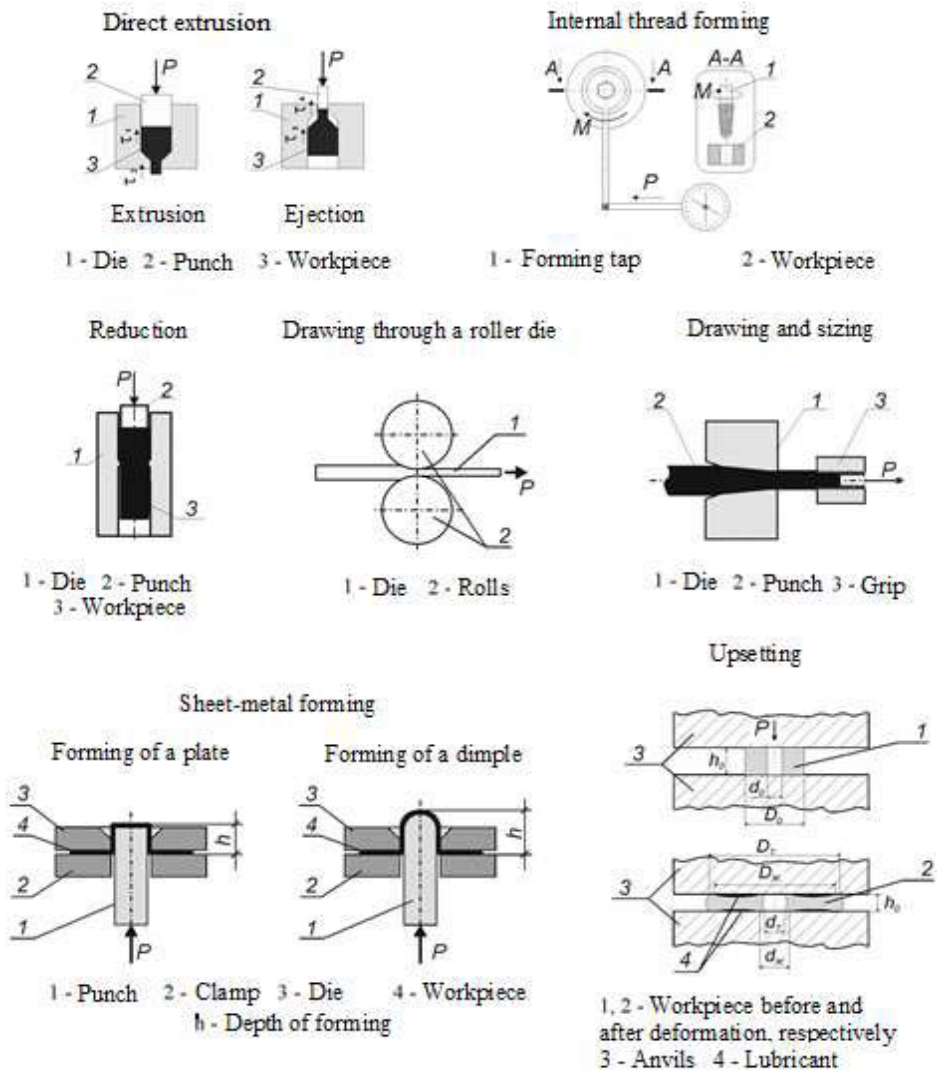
Procedures for the deformation of workpieces, used when determining the tribotechnical properties of lubricants
